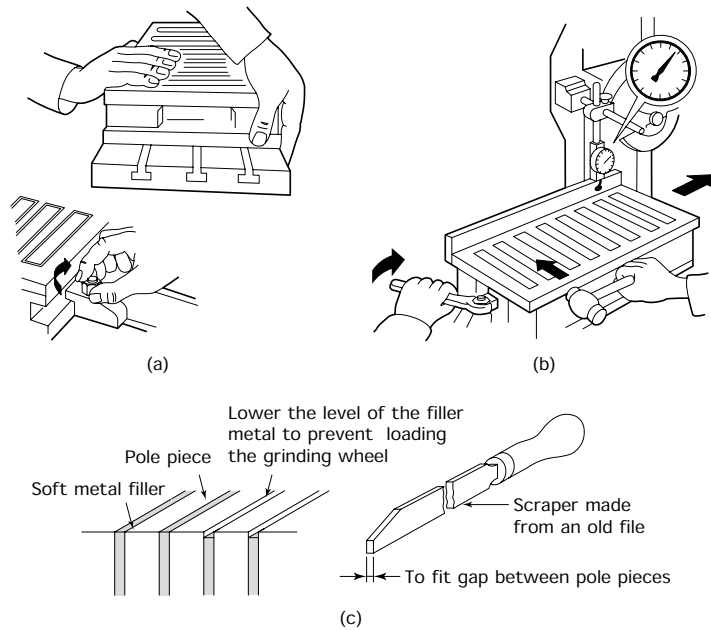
Mounting and setting a magnetic chuck: (a) place the chuck on the machine table and clamp lightly; (b) set parallel to table traverse and tighten clamps; (c) relief of soft filler metal between pole pieces
